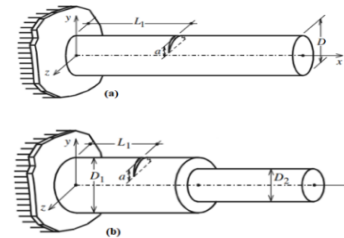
(a) Geometry of uniform cantilever beam with a crack; (b) Geometry of stepped cantilever beam with a crack [4]
